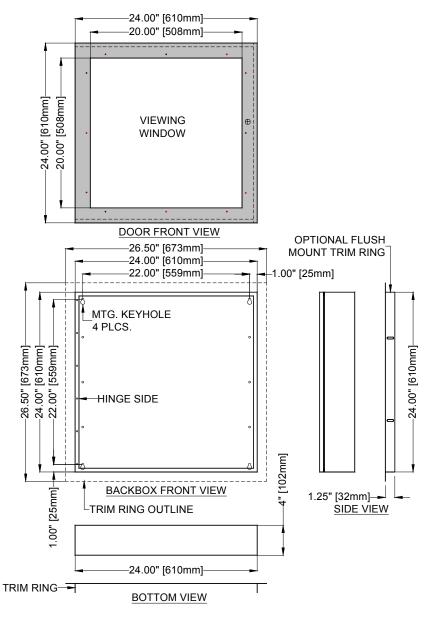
Door Assembly and Back Box Dimensions, P/N 10-2691
